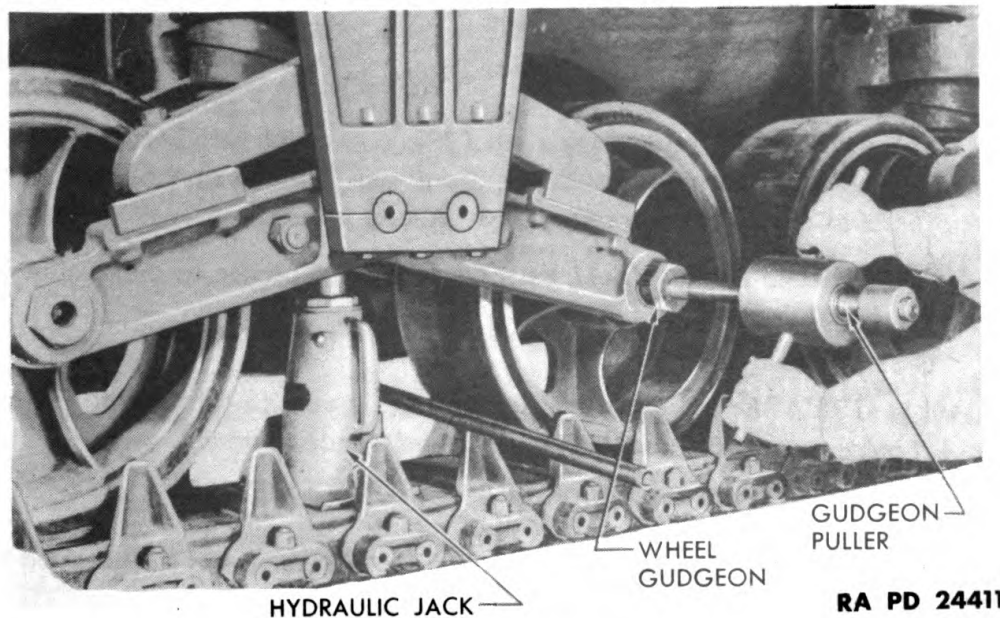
Pulling Wheel Gudgeon Pin to Remove Bogie Wheel
